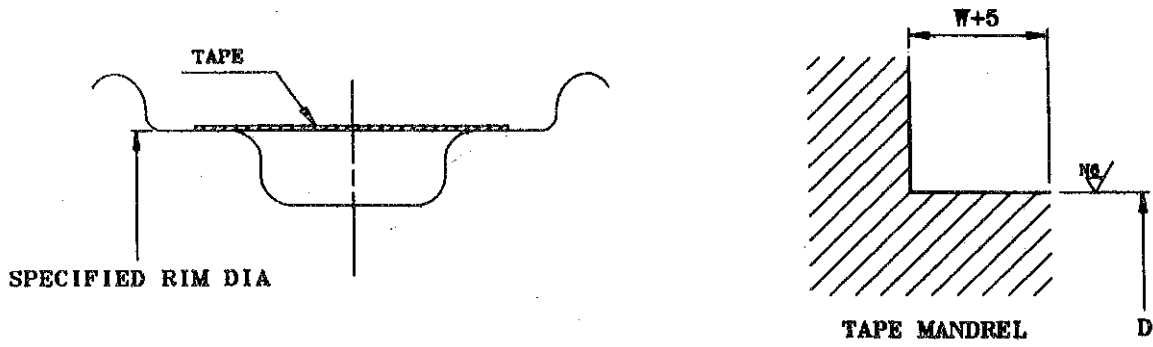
MEASUREMENT OF CYLINDRICAL BEAD SEAT RIM
